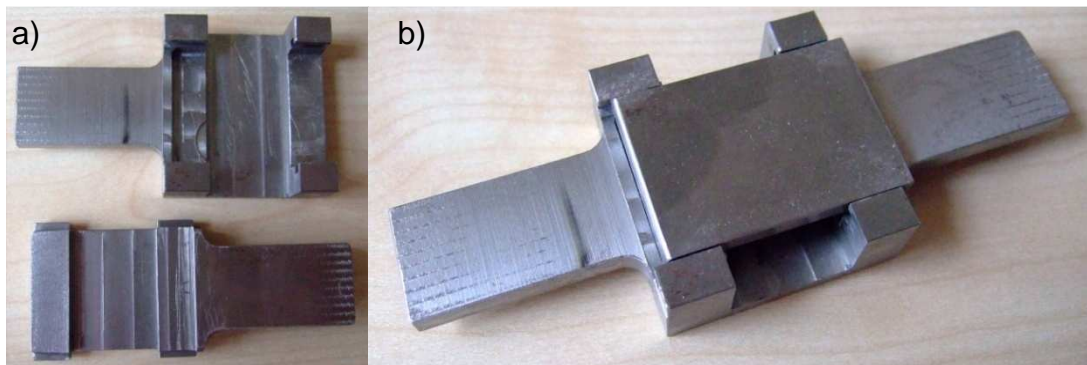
Jig for shear strength tests: a) individual parts and b) whole jig
